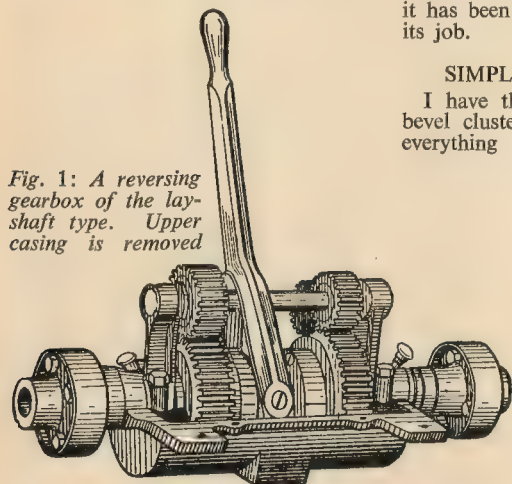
A reversing gearbox of the lay-shaft type. Upper casing is removed
